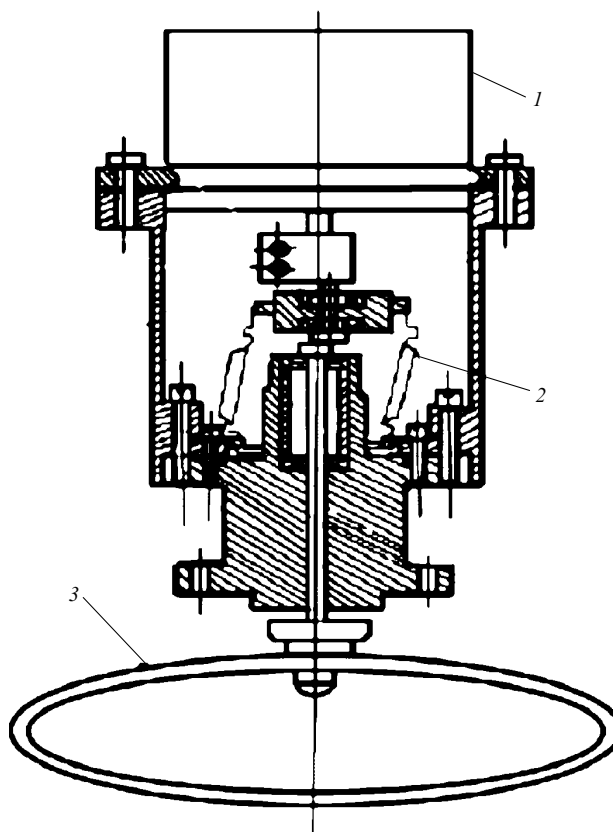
Frequency tuning unit: 1 — stepper motor, 2 — bellows, and 3 — ring.
